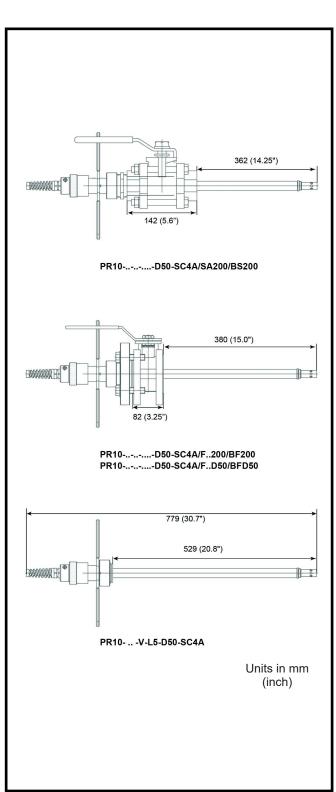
Dimensional drawing PR10...-D50 with mounted SC4A sensor
